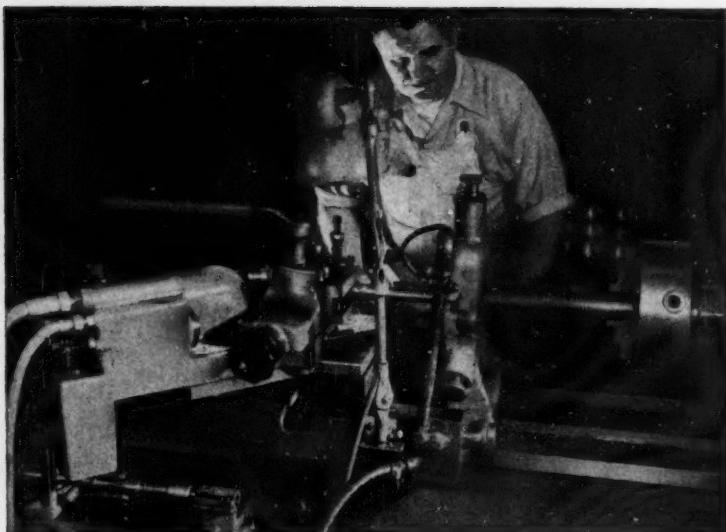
The Bore of the Barrel is Machined on a Monarch Lathe Equipped with a Tracer Attachment. In the Foreground on the Left may be seen the Stylus and Master
